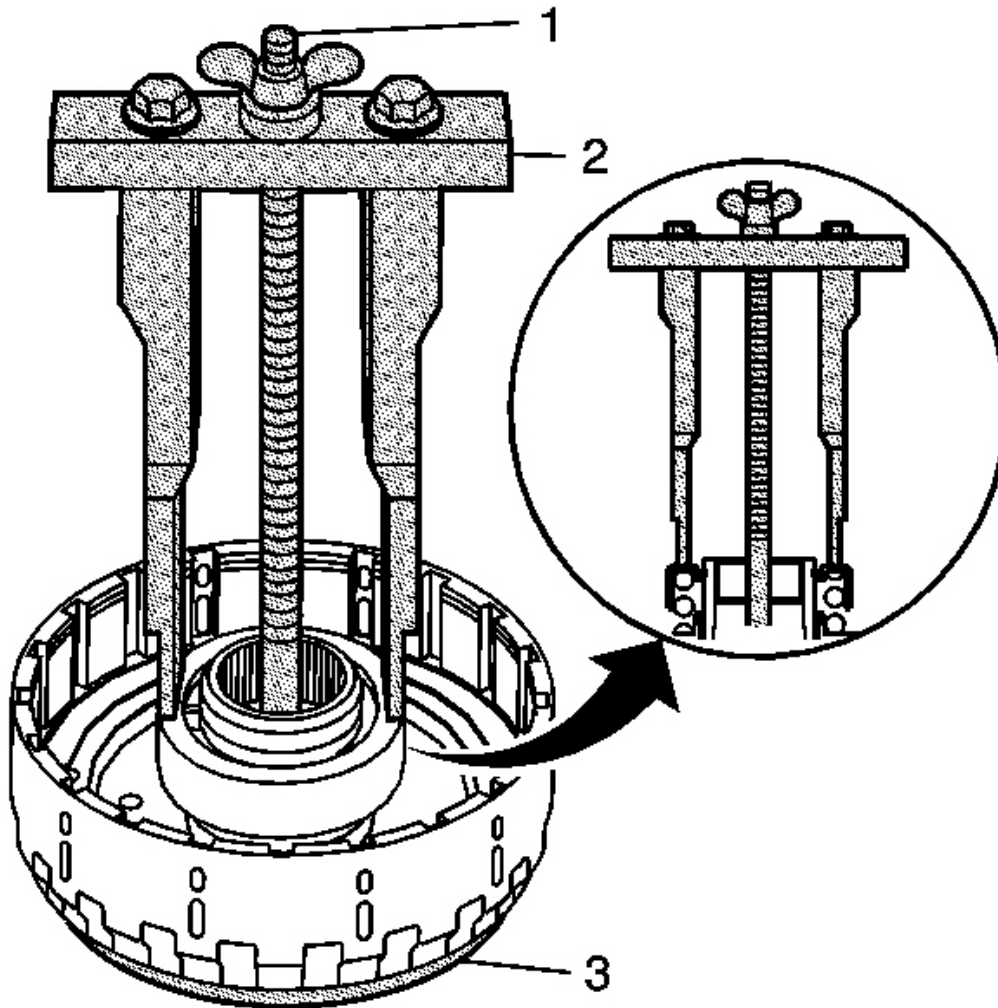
3rd Clutch Disassemble, J 45124, J 23327, J 21420-2, Clutch Piston Return Spring & Clutch Spring Retainer Cap Retaining Ring
